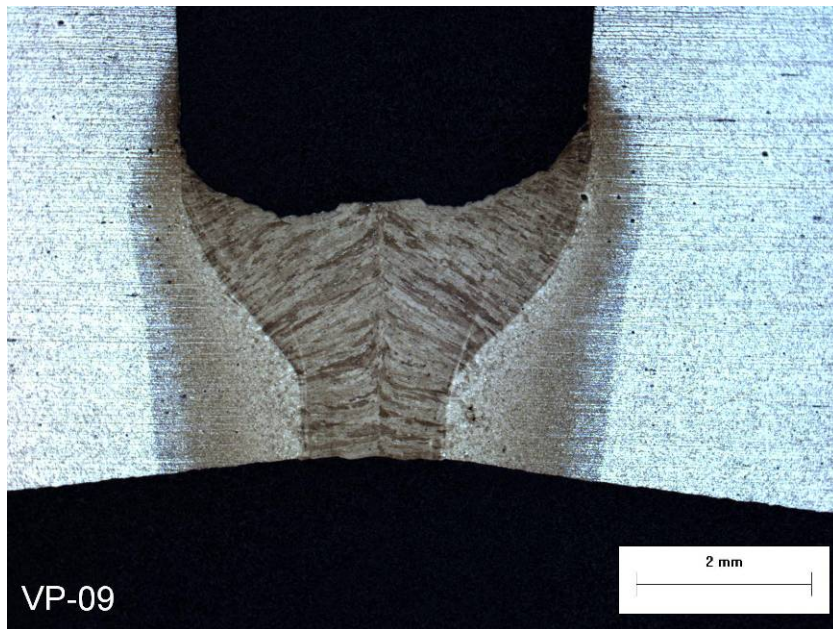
Macrosection of Weld VP-09 Made in the Vertical-Down Position using GMAW-VP
